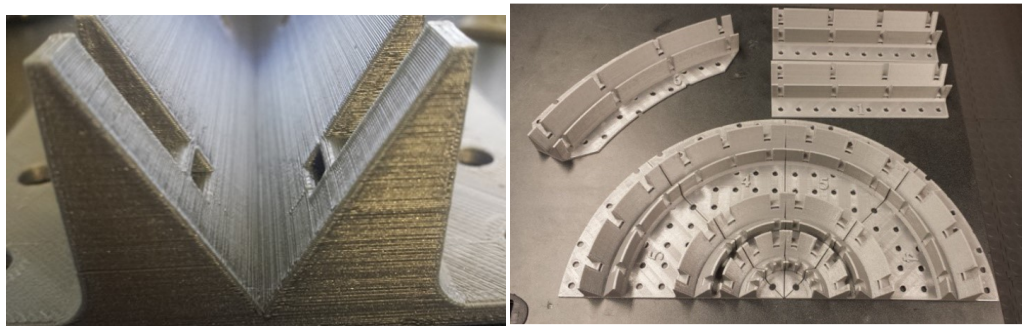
Photos of 3D printed corrugated pipe holders for 2-dimensional bend testing
